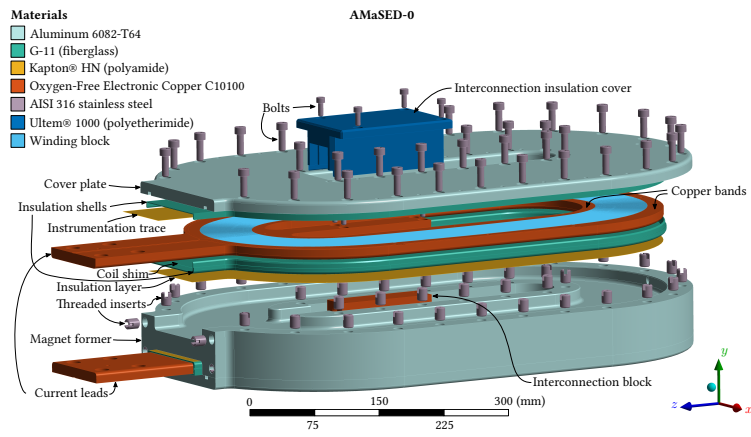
An exploded view of the components of the dummy coil, AMaSED-0.
